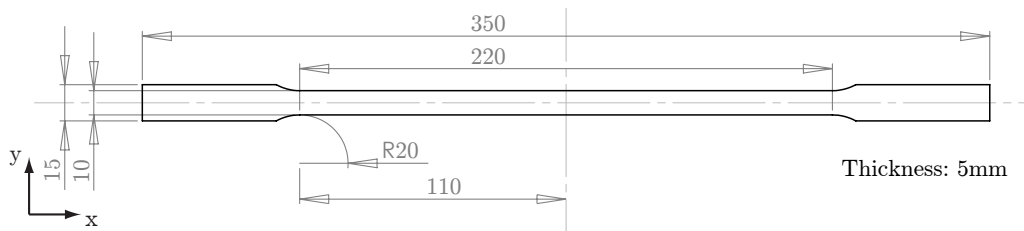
The dimensions of the tensile specimen. Dimensions are in mm.
